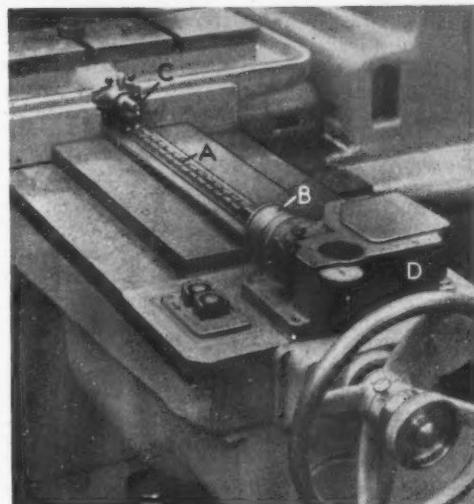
Close-up view of the Master Bar measuring system employed on the Buswell & Sweeney jig boring machine
